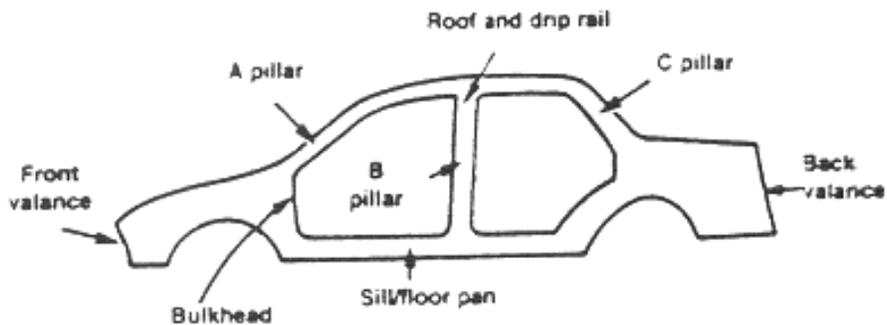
Possible Laser Welding Areas of Autobody
